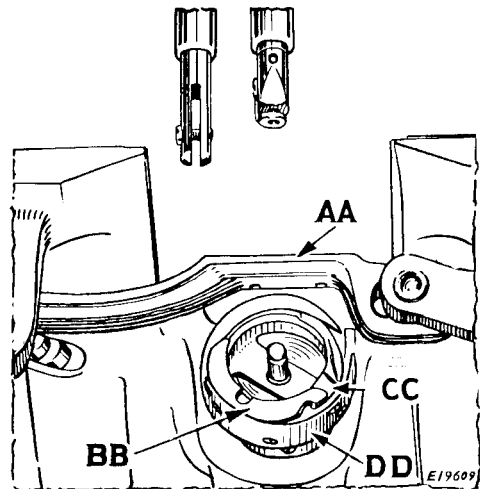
Showing Correct Position of Thread Guard (DD) and Bobbin Case Holder (BB) for Removal of Sewing Hook
